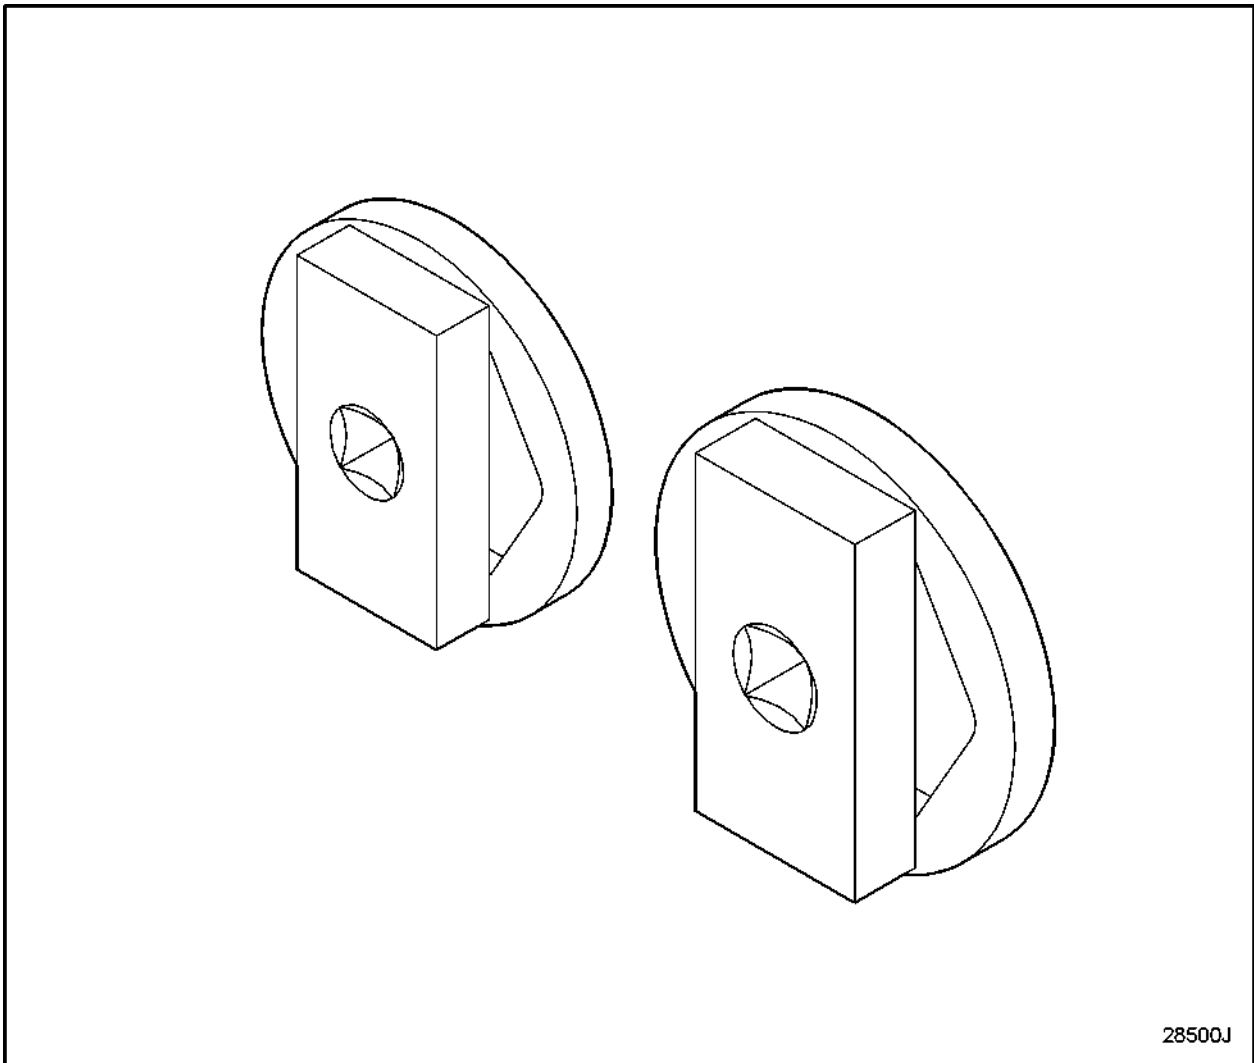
Cam Idler Gear Nut Socket Set,J 29744
